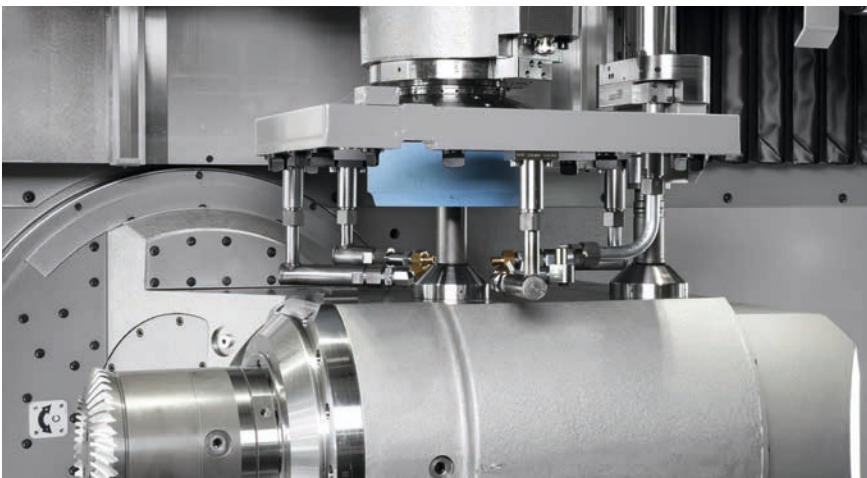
Automatic pick-up of the grinding wheel and grinding oil supply
